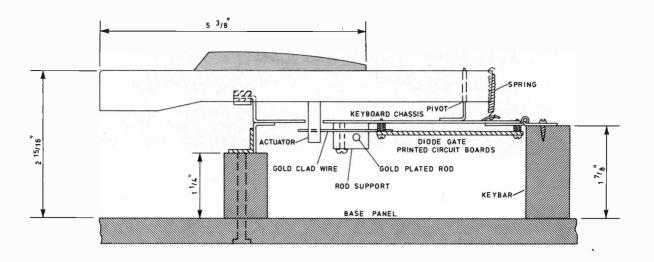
Keyswitch and Diode Gate p.c.b. mounting detail
